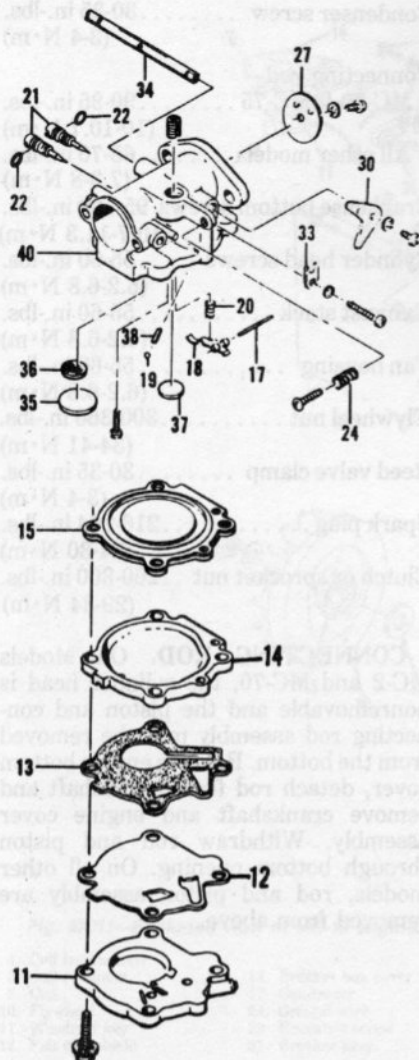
Exploded view of McCulloch 50070C diaphragm carburetor and diaphragm type fuel pump assembly used on MC-10 engine.
